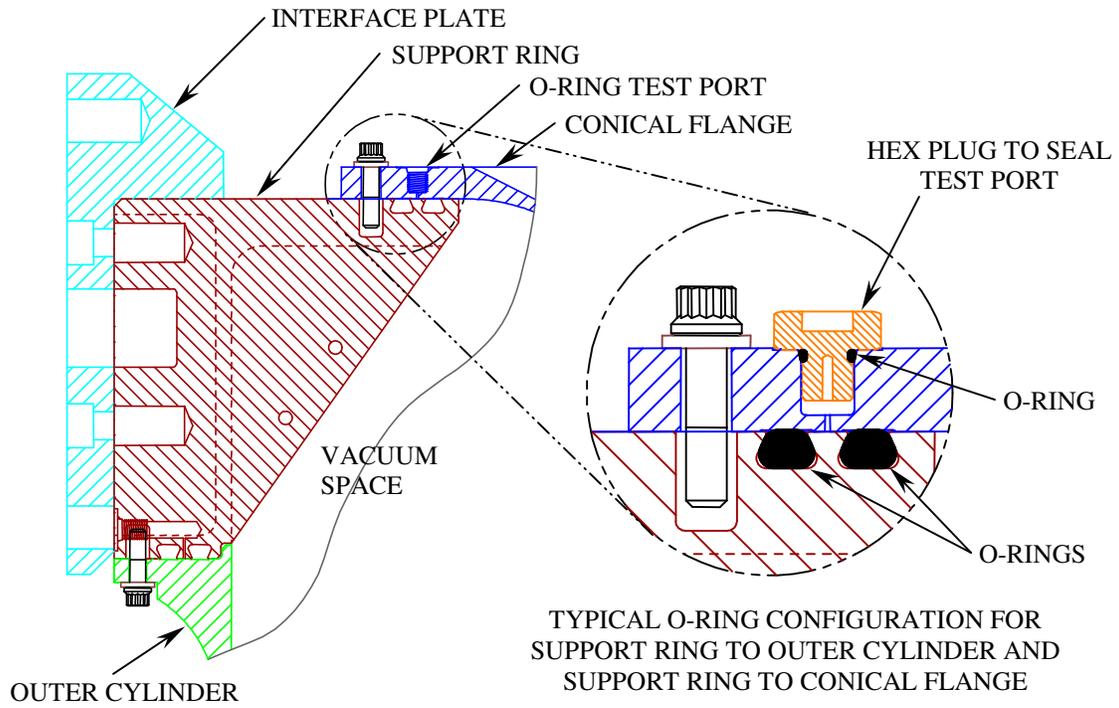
Outer Joint Assembly Detail
